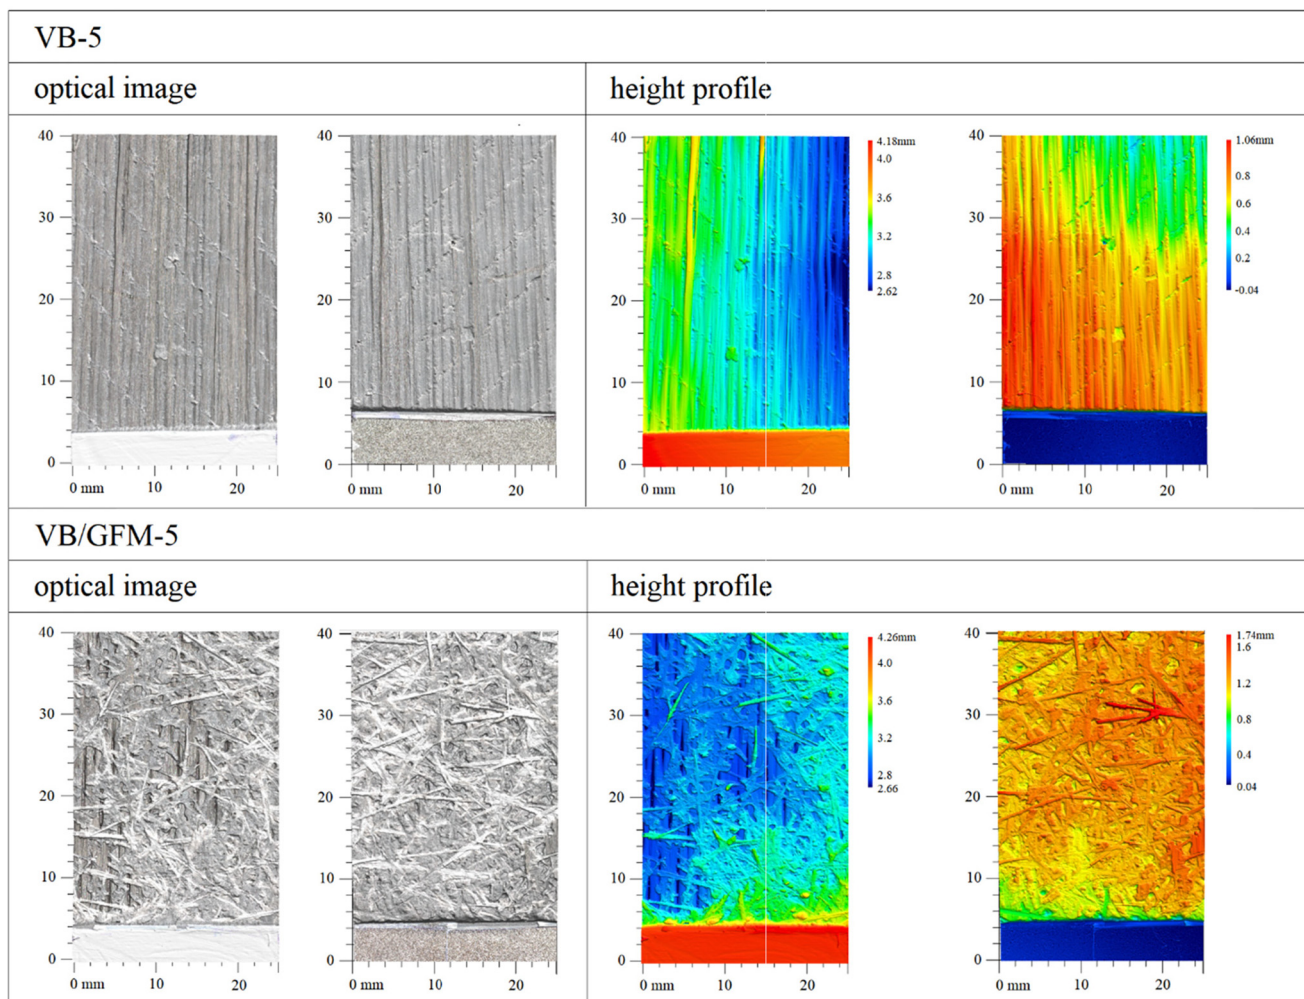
Representative fracture surfaces of specimens manufactured using vacuum bagging under 40% mode II fracture.
